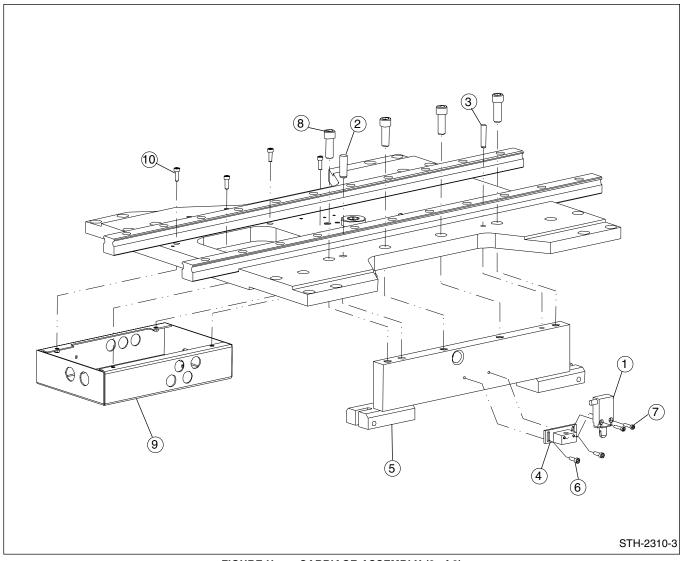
FIGURE H - CARRIAGE ASSEMBLY (3 of 3)
